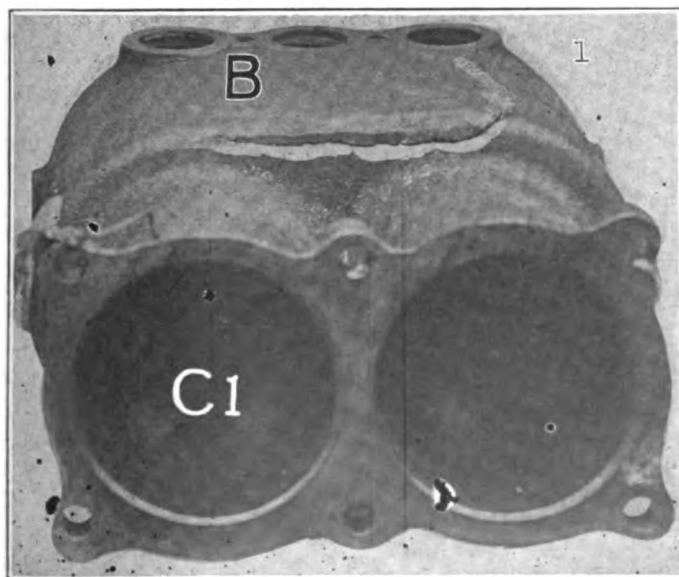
Cylinders, cracked by frost, showing V-gap for welding
